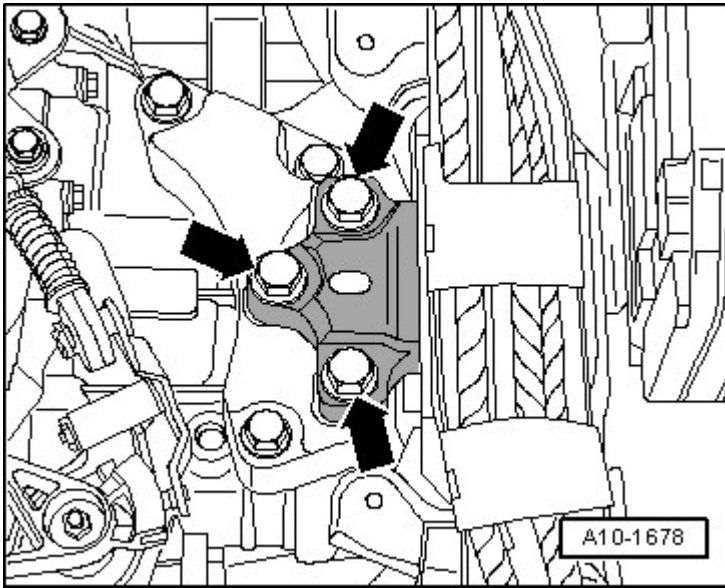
Identifying Bolts To Assembly Mounting On Transmission
